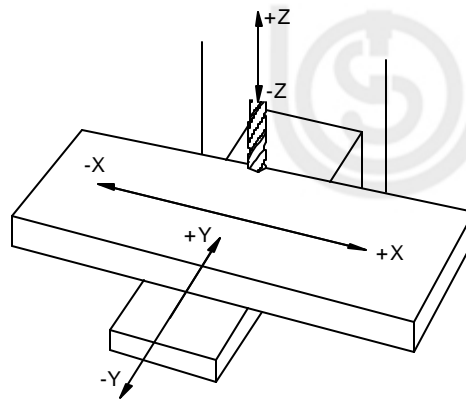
Vertical Axis Milling Machine or Machining Centre
